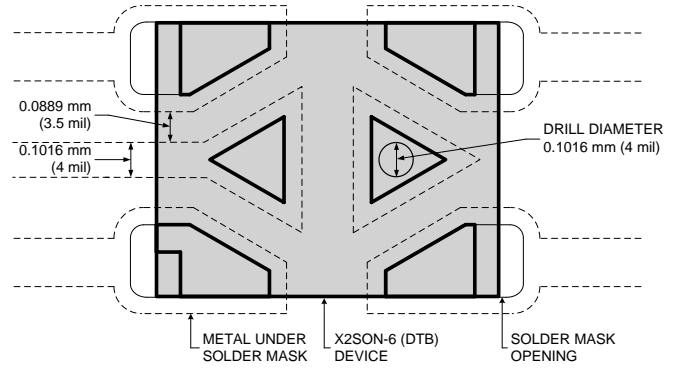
X2SON-6 (DTB) Package PCB Footprint Example Without Bypass Capacitor Shown
